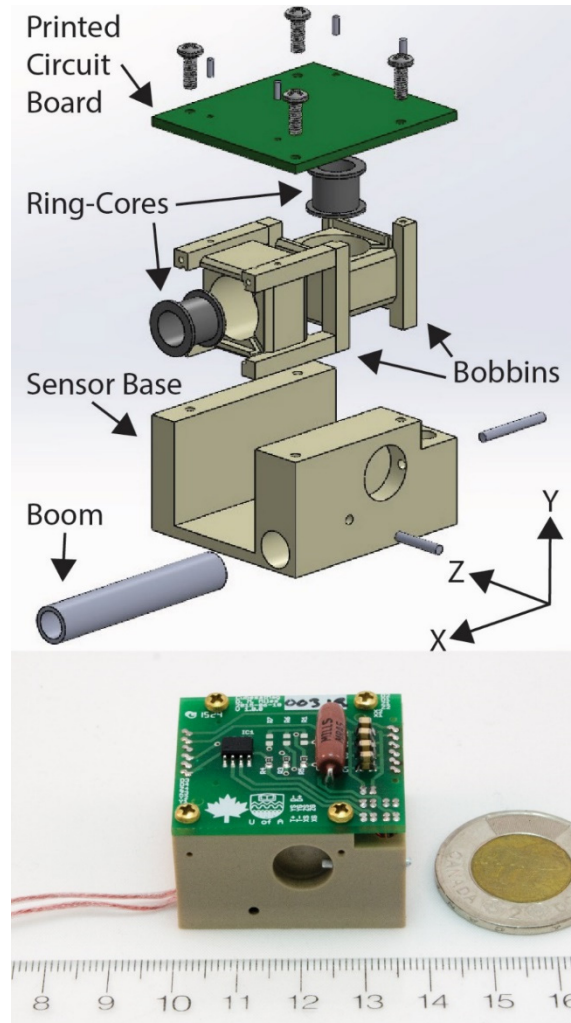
Miniature fluxgate sensor assembly. (Top) Blow up of the CubeSat sensor assembly showing major components. (Bottom) Miniature fluxgate sensor assembly occupying 36 x 32 x 28 mm and massing 47 g.
